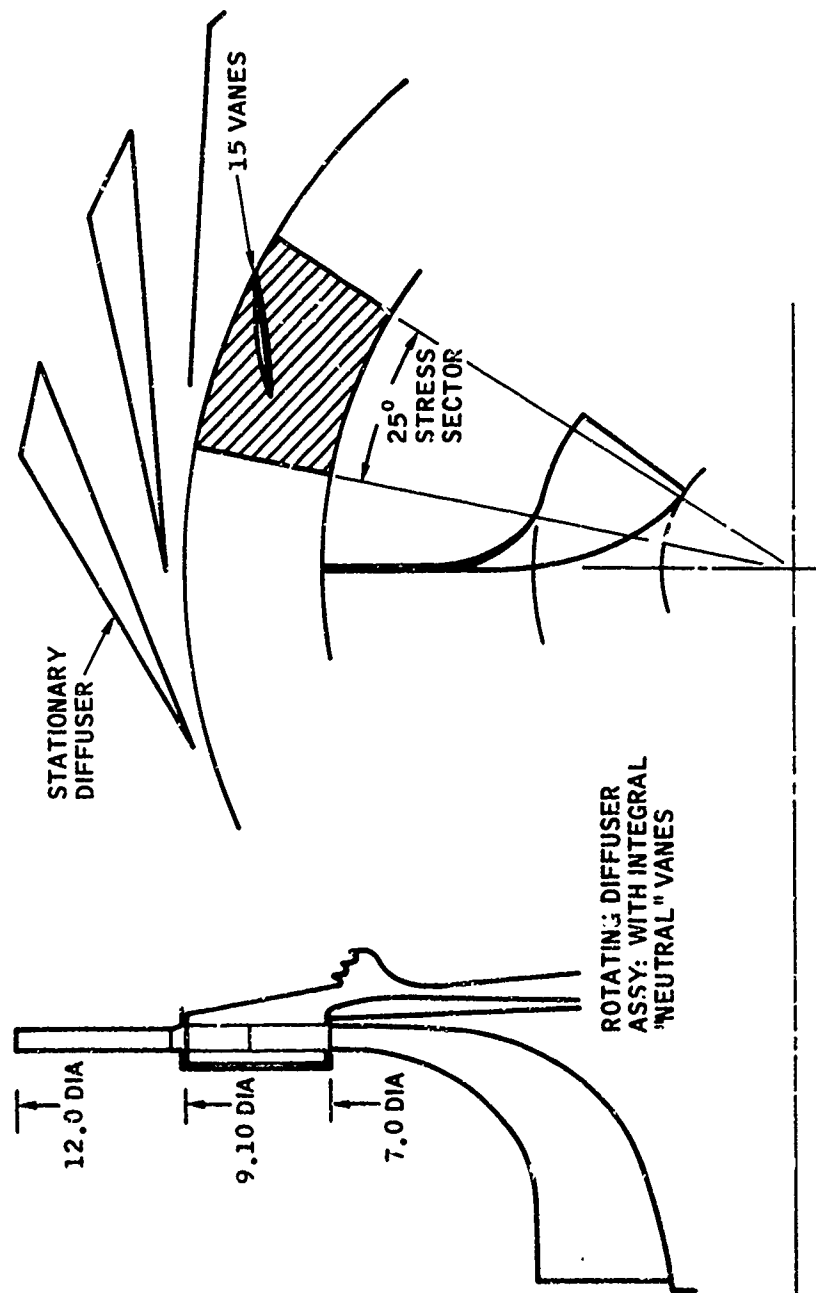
Rotating Diffuser Assembly with Integral "Neutral" Vanes
